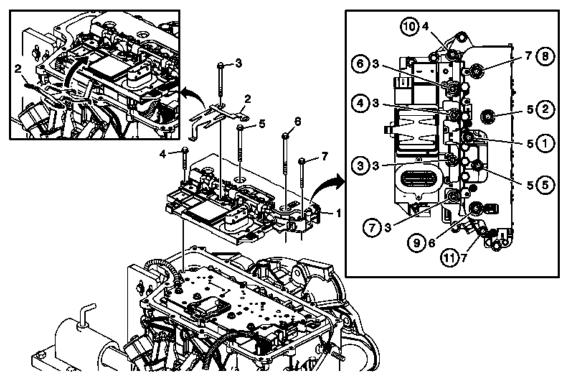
Filter Plate Installation Courtesy of GENERAL MOTORS COMPANY
